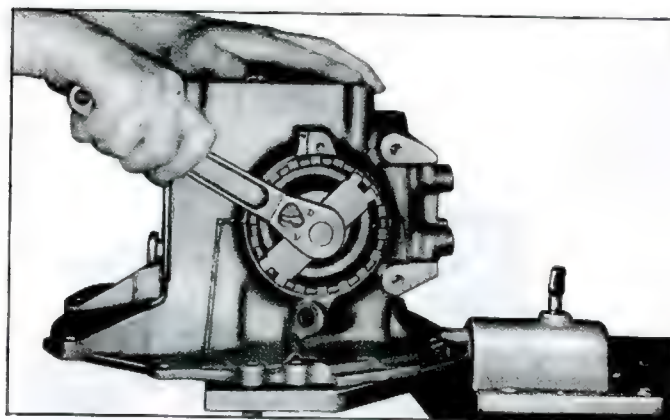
Removing Side Bearing Adjusting Sleeve with J-8342
